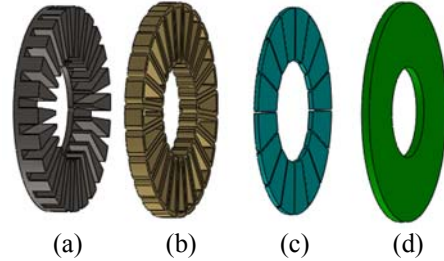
Schematic AFPM motor assembly: (a) stator, (b) coil, (c) magnet, and (d) back plate
